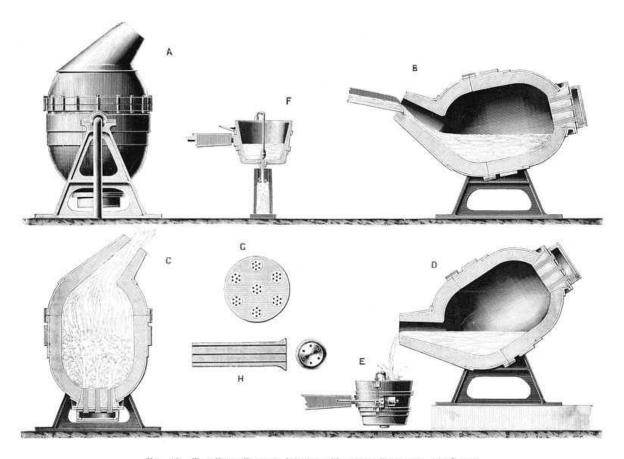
The First Form of Bessemer Moveable Converter and Ladle
